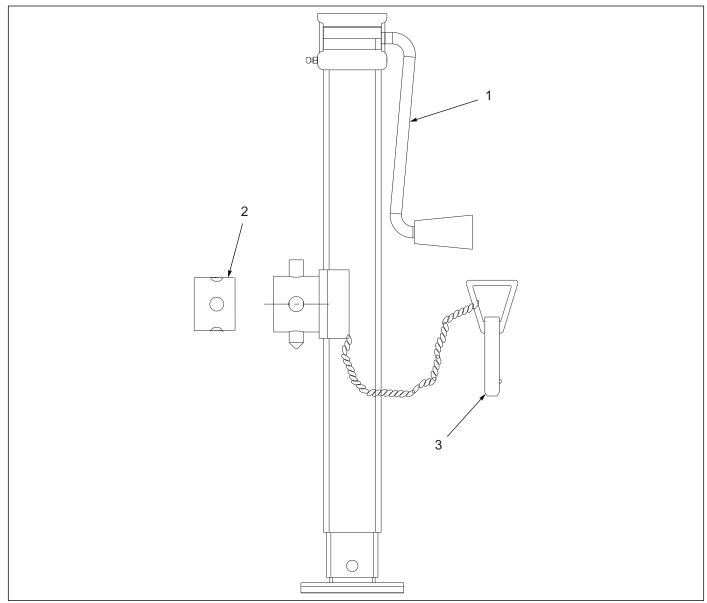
7,000 Lb. Sidewind Jack Assembly
